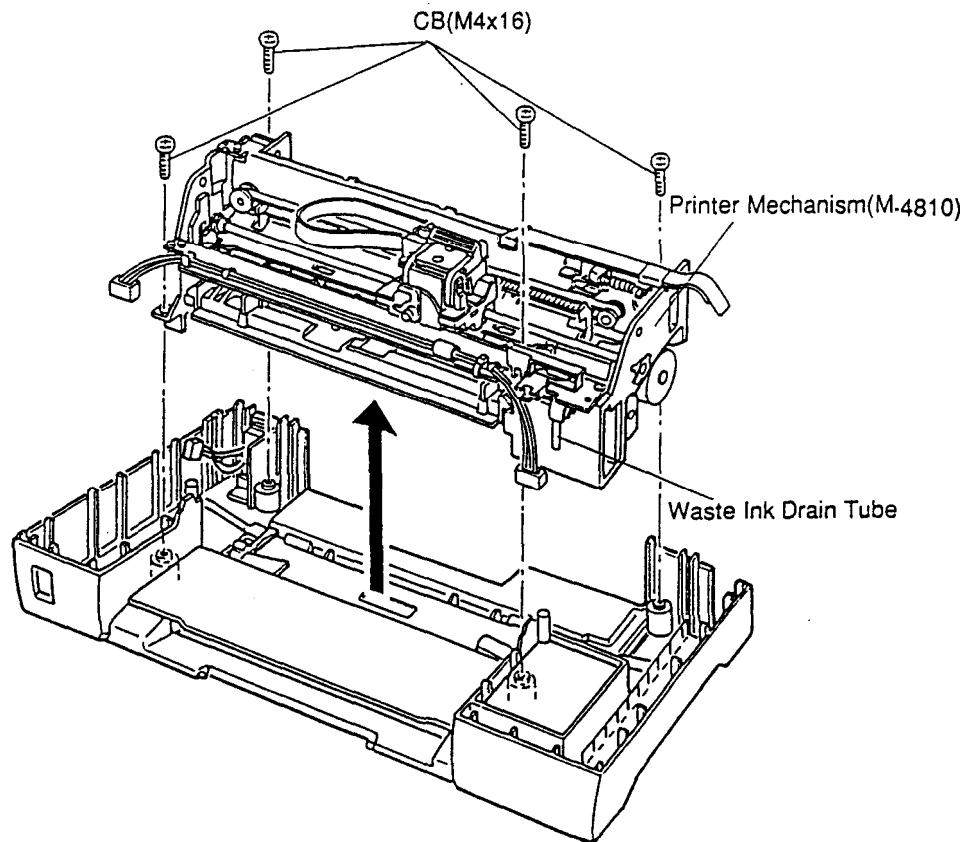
PRINTER MECHANISM (M-4810) Removal
